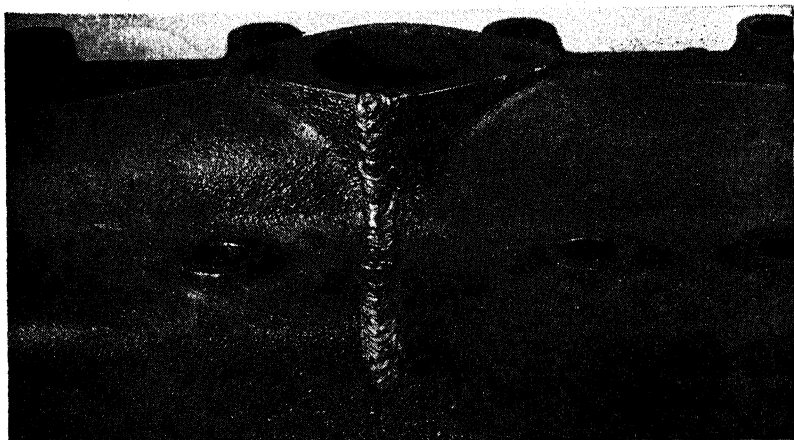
Weld on engine head made by steel electrode of shielded arc type.
